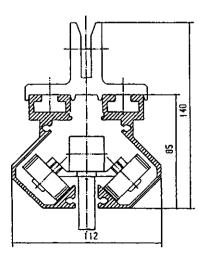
Cross-section of an overhead package conveyor system rail [11]
